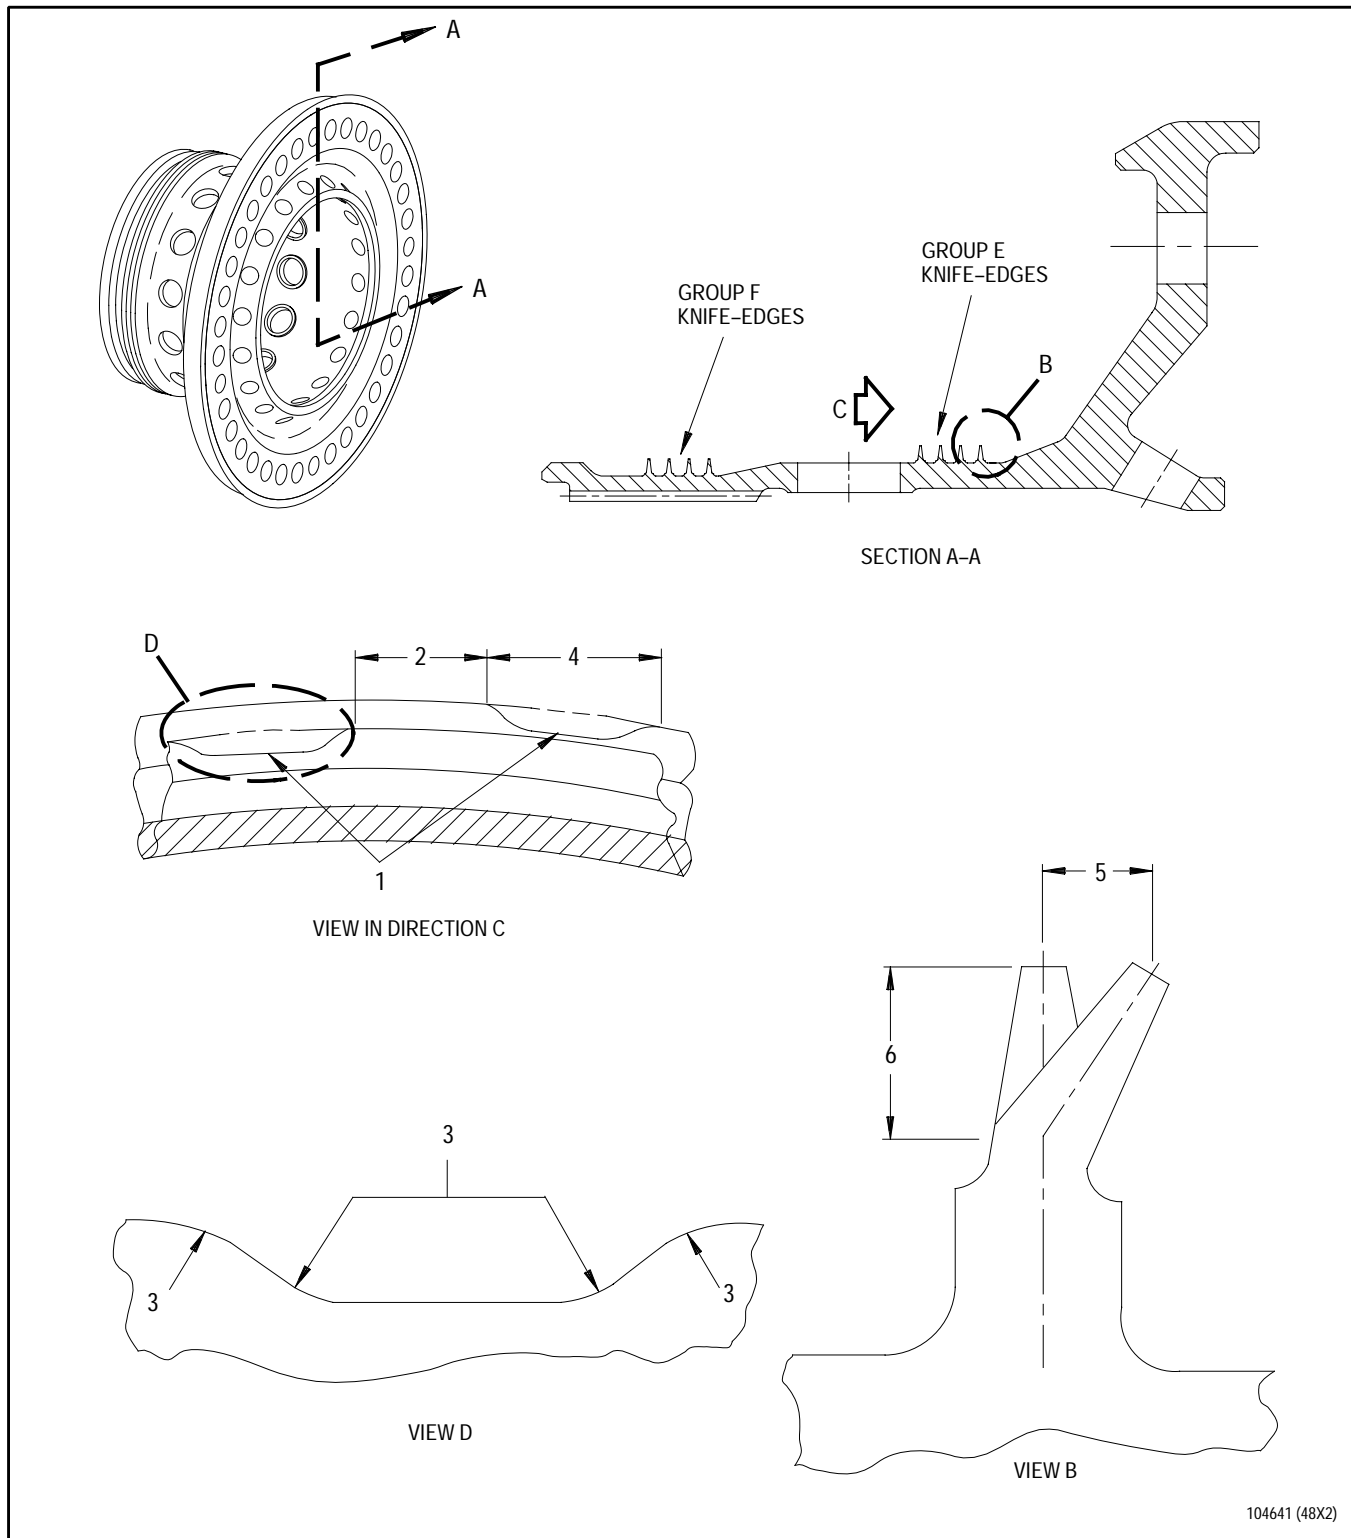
Front Turbine Hub Assembly - Knife-Edge Blend Repair
